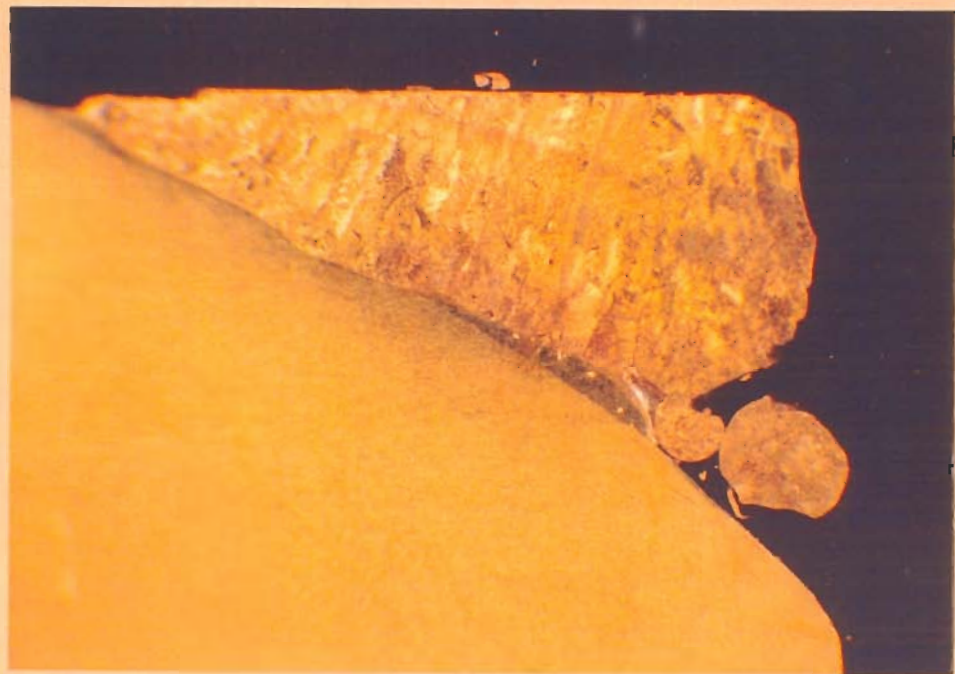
Cross Sectional View of Incomplete Penetration in Circumferential Weld
